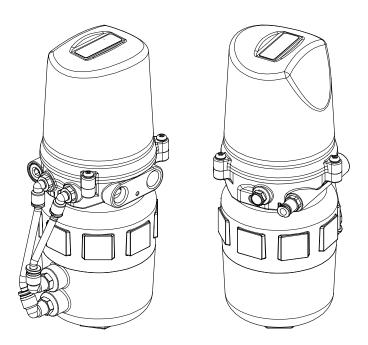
Double Acting Actuator Pneumatic Piping Example
